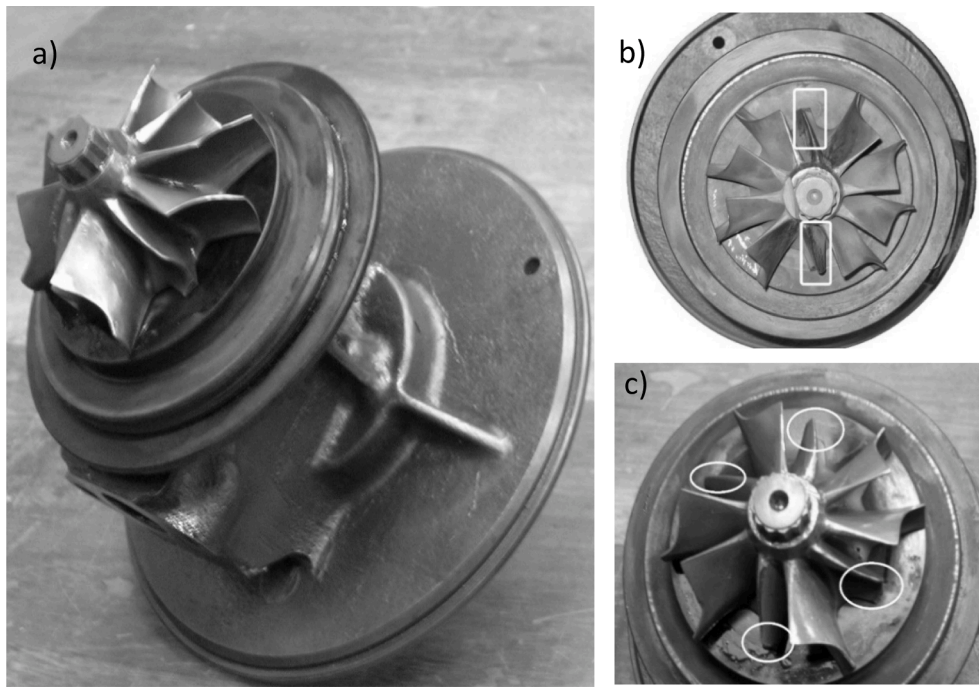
Free power turbine impeller with damaged blades, (a): impeller body, (b): two damaged blades (D2), (c): four damaged blades (D4).
